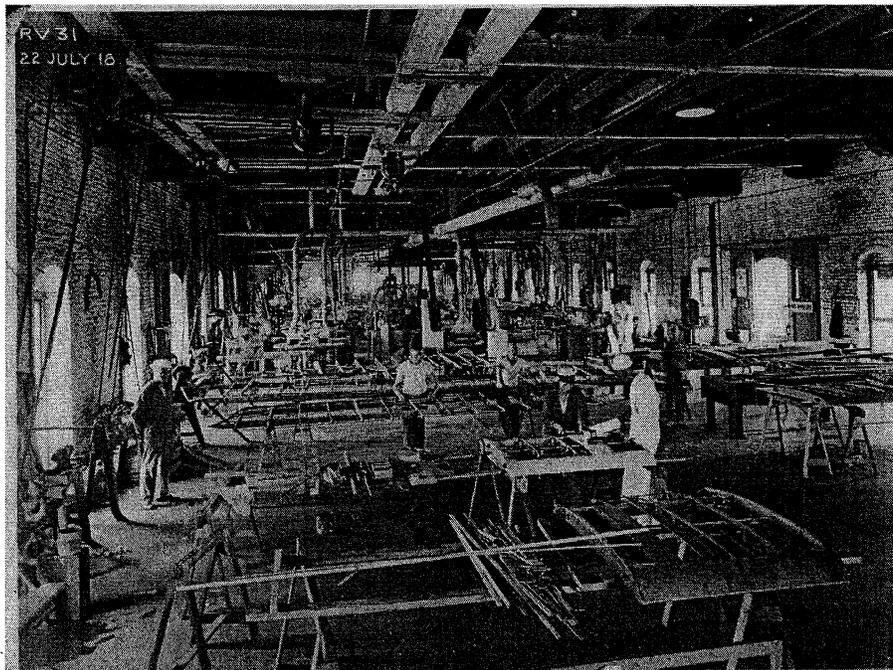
1918 interior view of Building No. 1 showing the second-floor workshop where workmen are constructing airplane wings. (Photo courtesy of Public Affairs Office (Building No. 624), NAS Pensacola, Florida).
